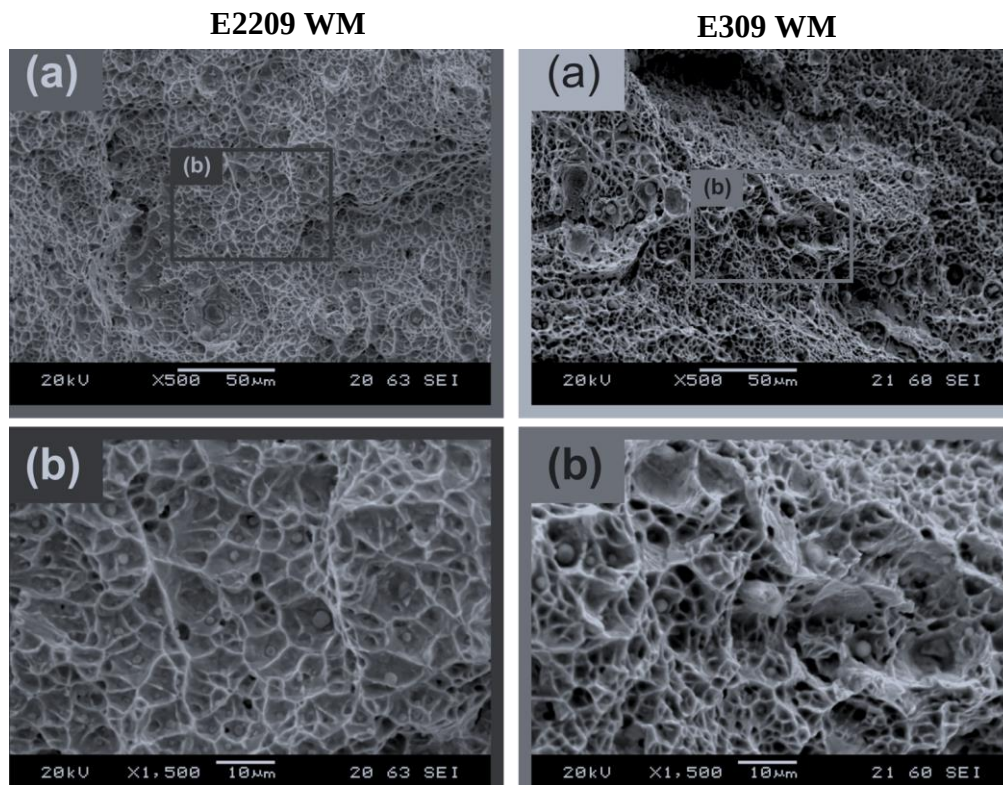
SEM fractograph of the weld metals specimens E2209 WM and E309WM
